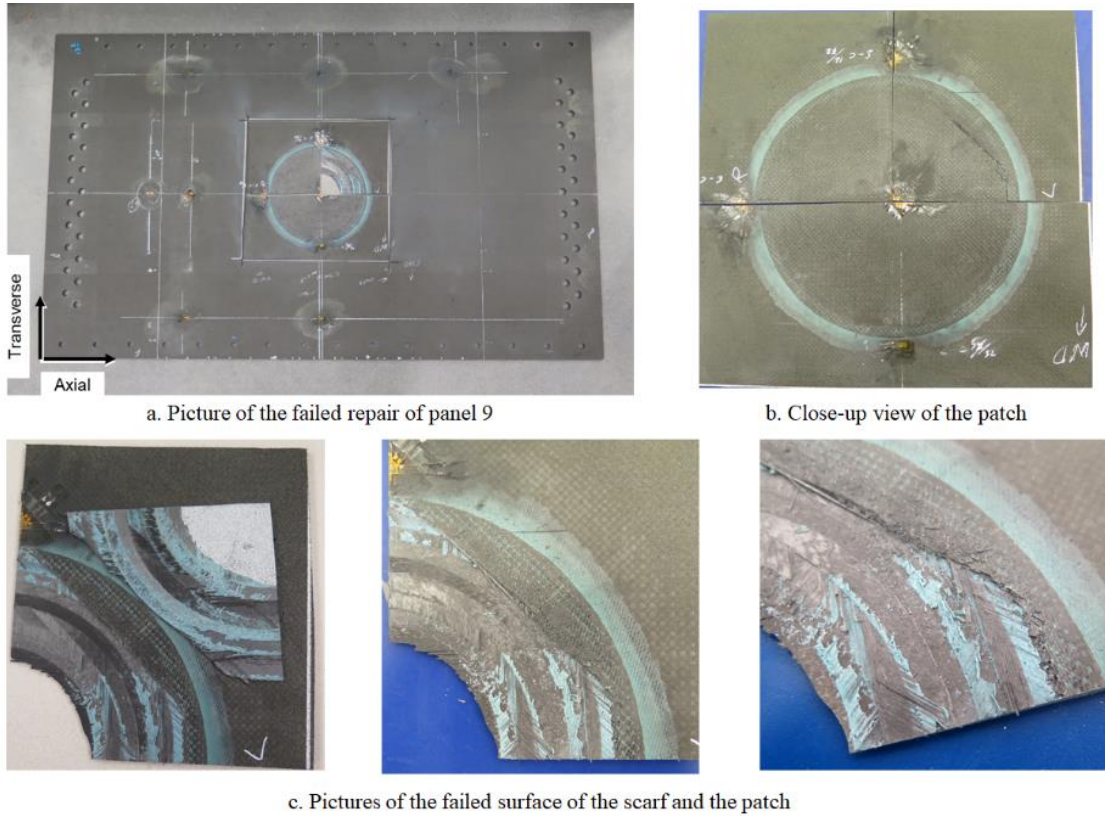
Post-test visual inspection of failed panel 9 (repair patch side)
